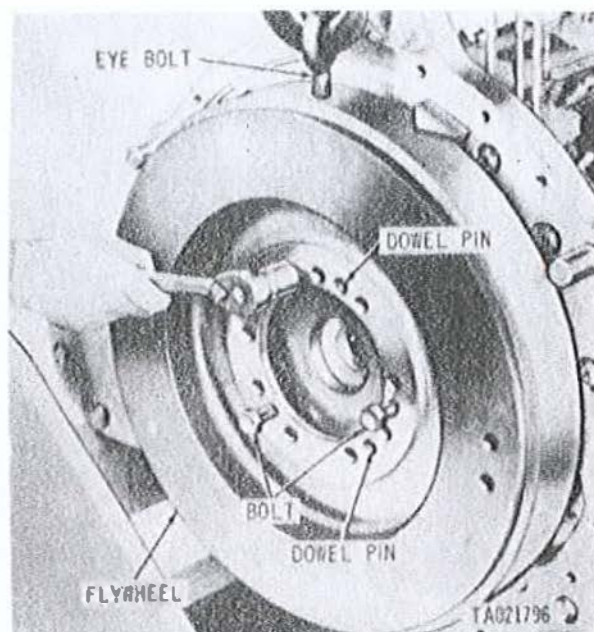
Removing flywheel, model AVDS-1790-2C and AVDS-1790-2D engines.
